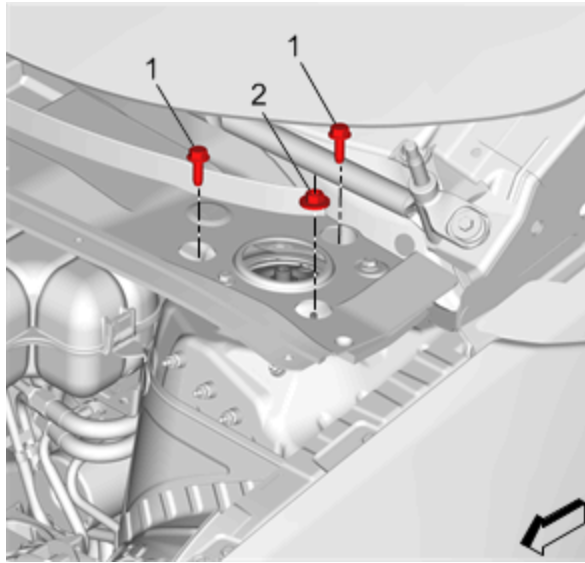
Front Suspension Strut Mount Bolts And Nut
